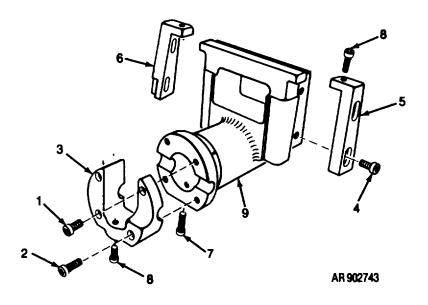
A. Disassembly/assembly of adapter assembly PN 11578873 for M101A1
